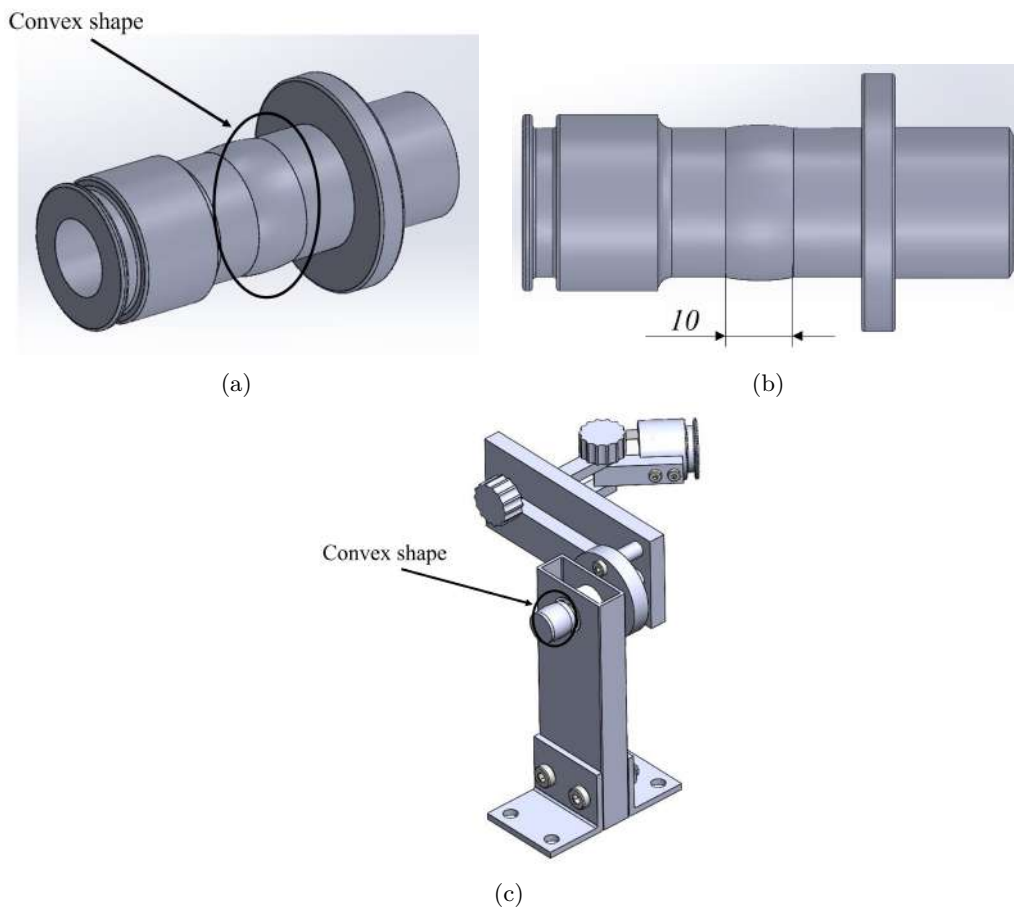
Convex shapes machined to endow stability during the belts movement. (a) Convex shape on the inlet fixation part. (b) Convex shape's length. (c) Convex shape on the outlet shaft.
